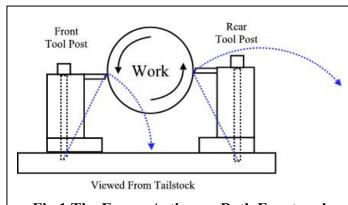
The Forces Acting on Both Front and Rear Tool Posts
